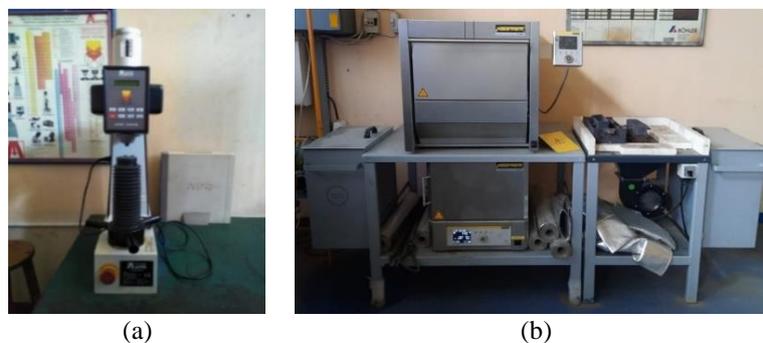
HB testing equipment with (a) AFFRI 206 MX machine and (b) shop hardening furnace (max. 1,200 °C)
